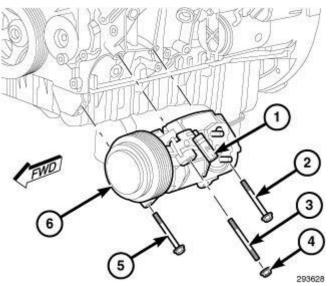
A/C Compressor Removal/Installation Courtesy of CHRYSLER GROUP, LLC
